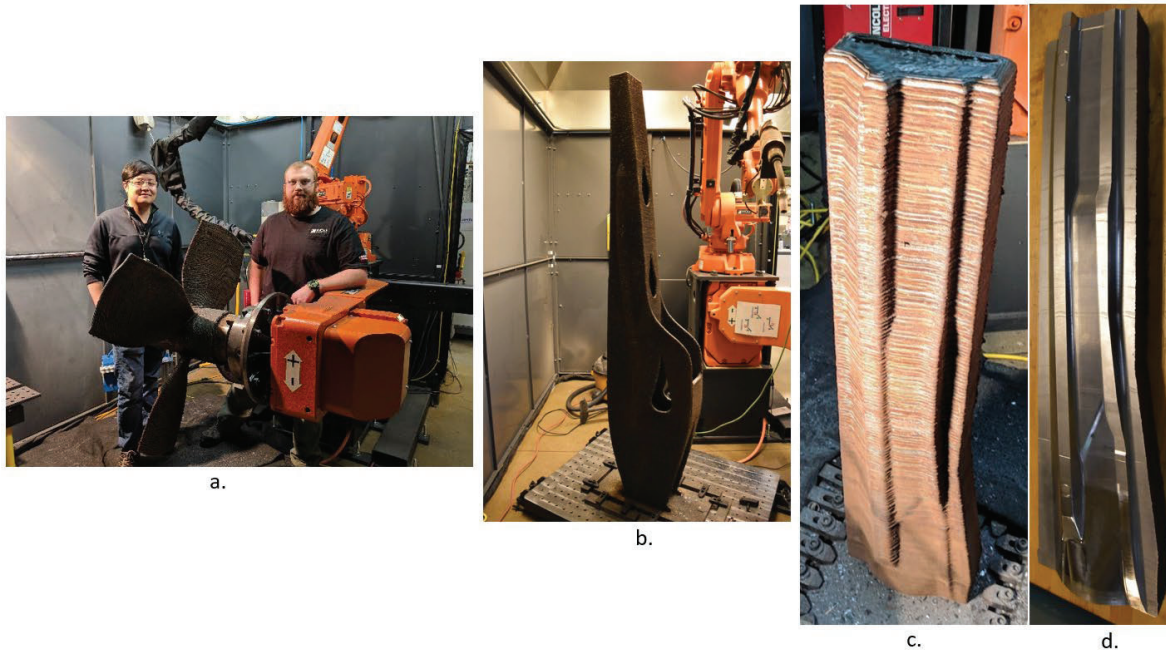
Parts created using wire-arc additive manufacturing. a.) Marine propeller b.) Excavator arm c.) Multi-material hot stamping die before machining d.) Multi-material hot stamping die after machining
